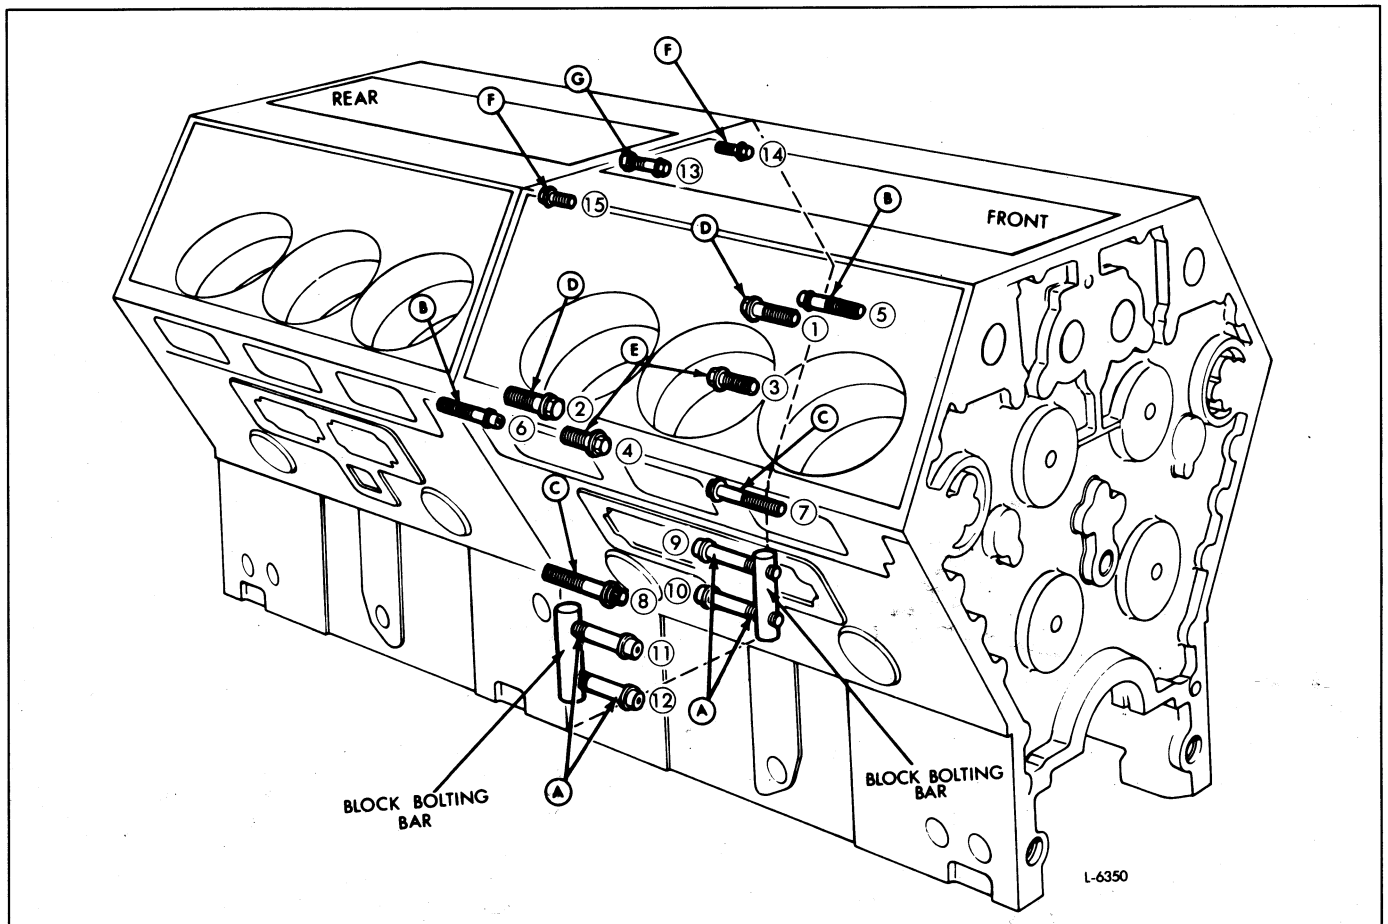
Location, Size and Tightening Sequence of Cylinder Block Attaching Bolts
